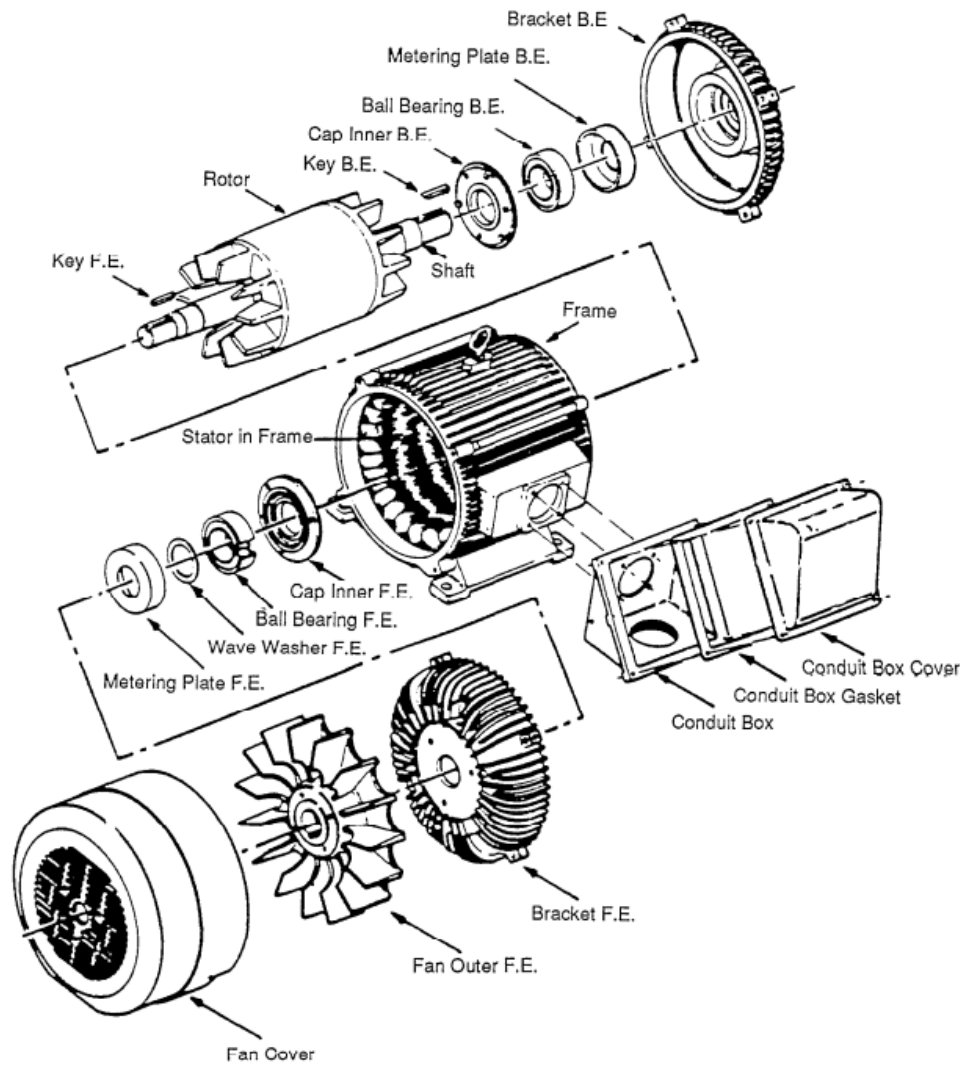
Exploded view of a typical construction of an Induction Motor [28].
